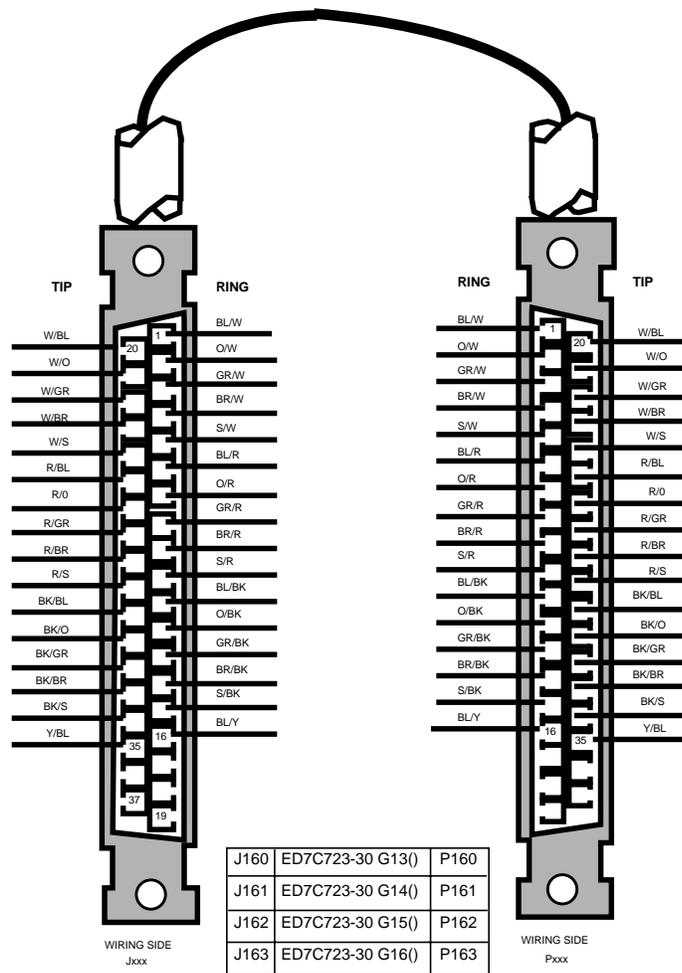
Cable Assembly ED7C723-30 Groups 130 through 160
